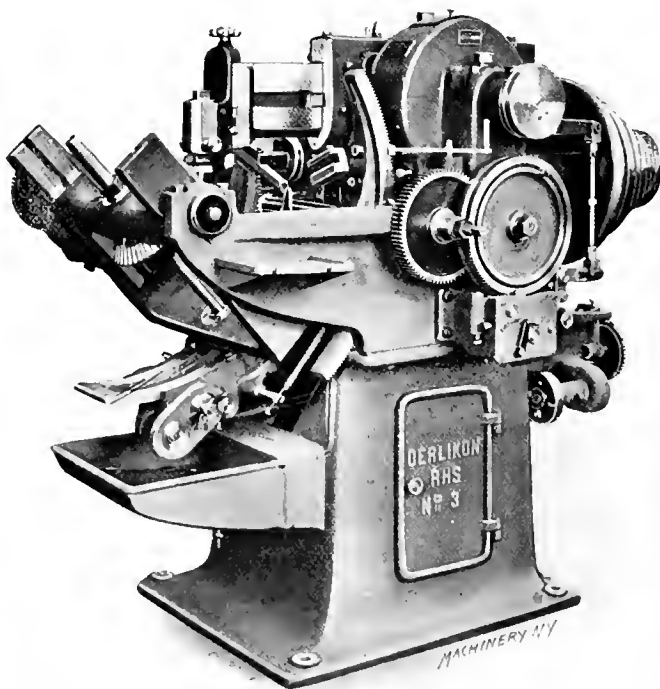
The Oerlikon Single-tool Templet Bevel Gear Shaper.
